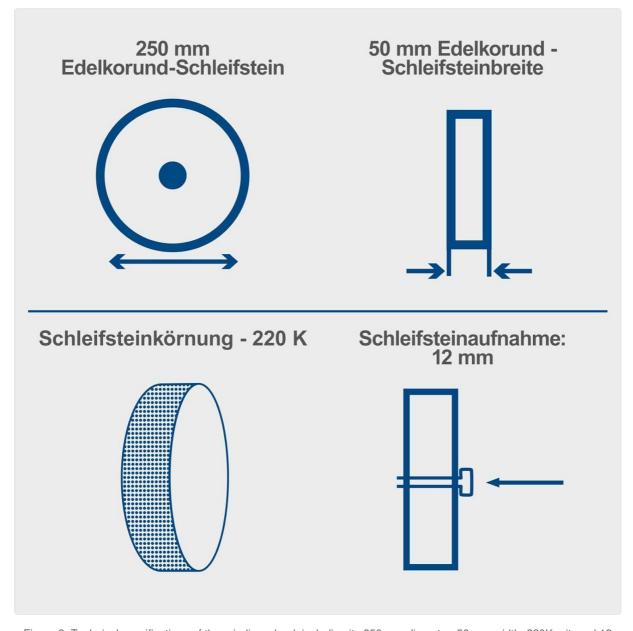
Technical specifications of the grinding wheel, including its 250 mm diameter, 50 mm width, 220K grit, and 12 mm bore for mounting.
